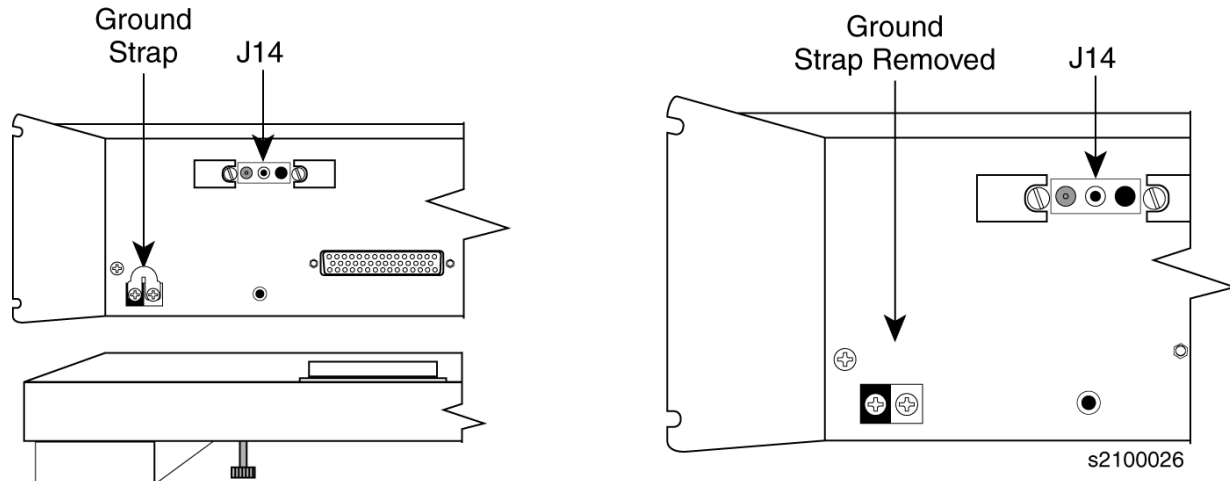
OT-21 Rear View (Rear Panel Removed)
